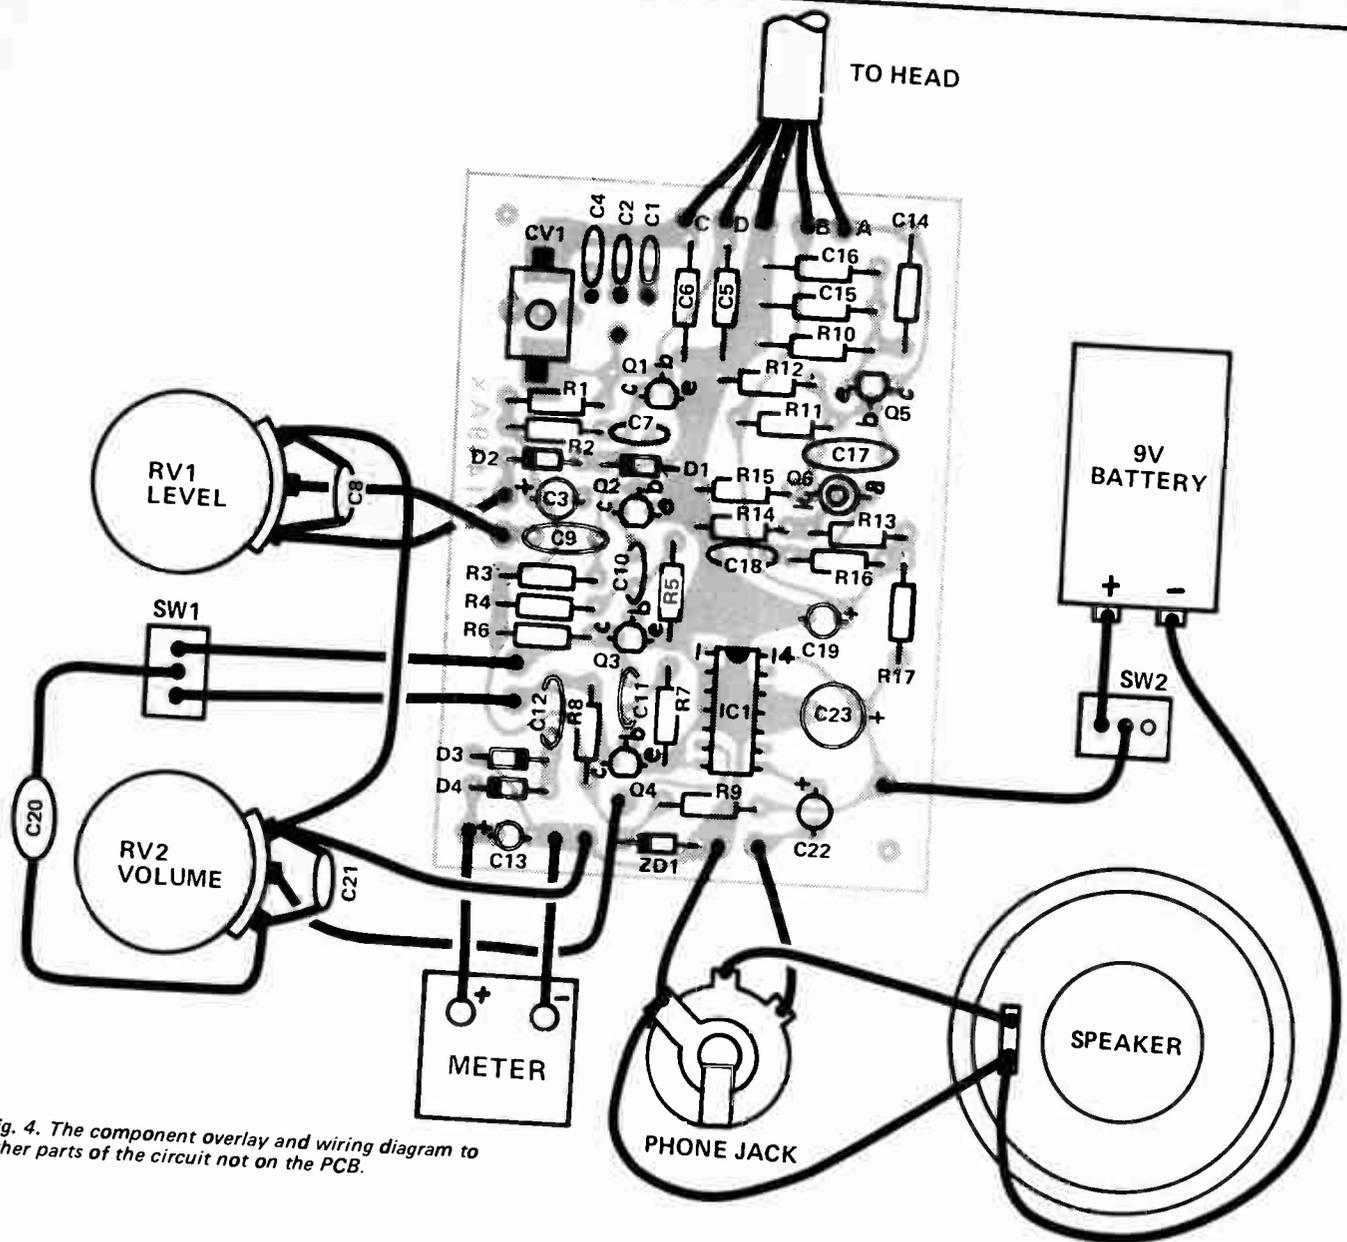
The component overlay and wiring diagram to other parts of the circuit not on the PCB.
